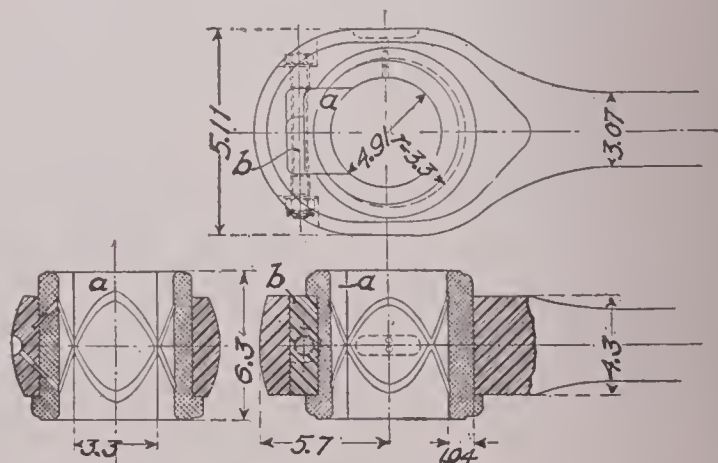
Connecting Rod for a Large Gas Engine with Cross Head.
